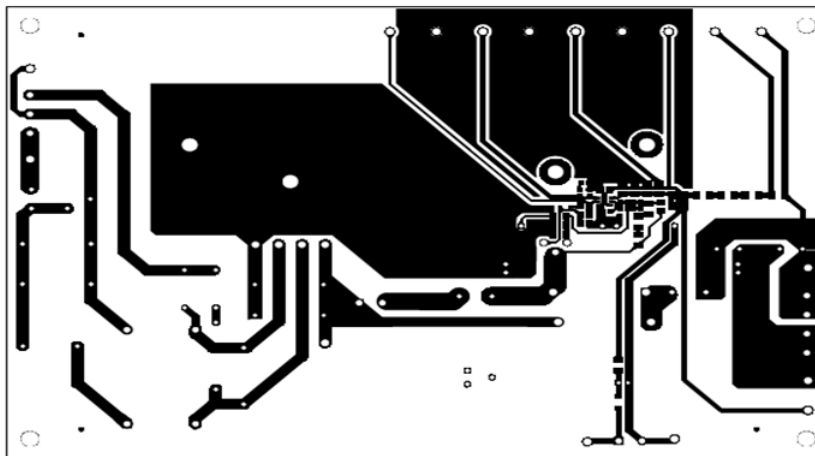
UCC28056BEVM-296 Bottom Copper Assembly Drawing (Top view)
